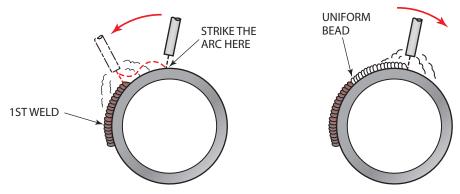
Keeping the weld uniform is important when restarting the arc.
